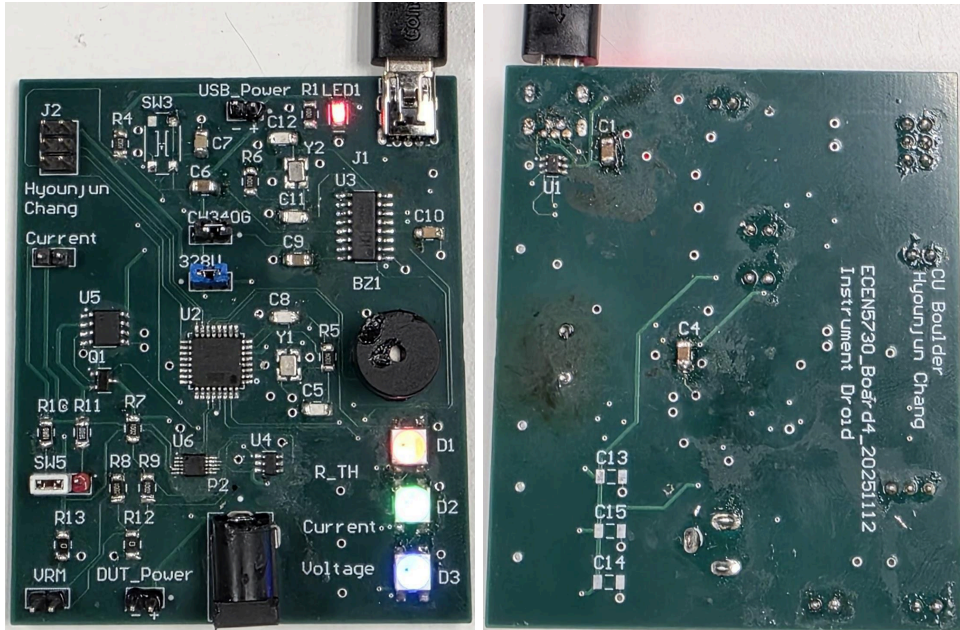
Assembled Instrument Droid PCB (Left: Front, Right: Back)
